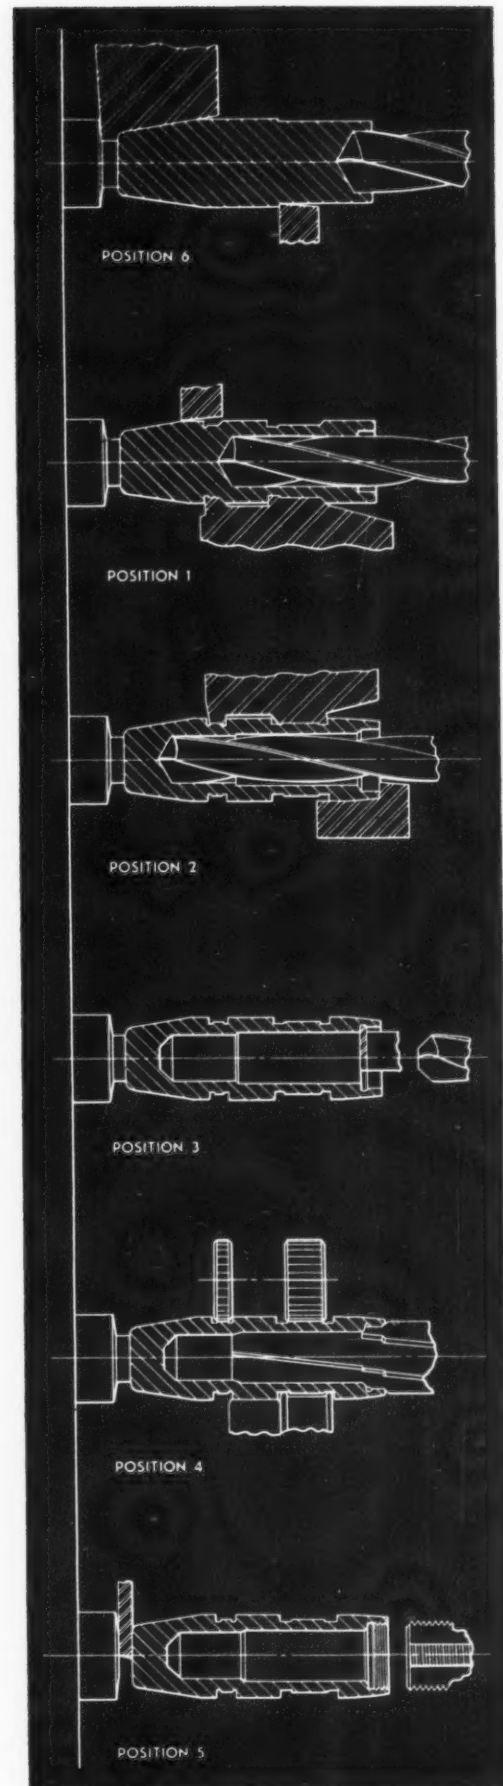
(Left) Tooling for Making a 25-millimeter Projectile Nose on a Six-spindle Machine
